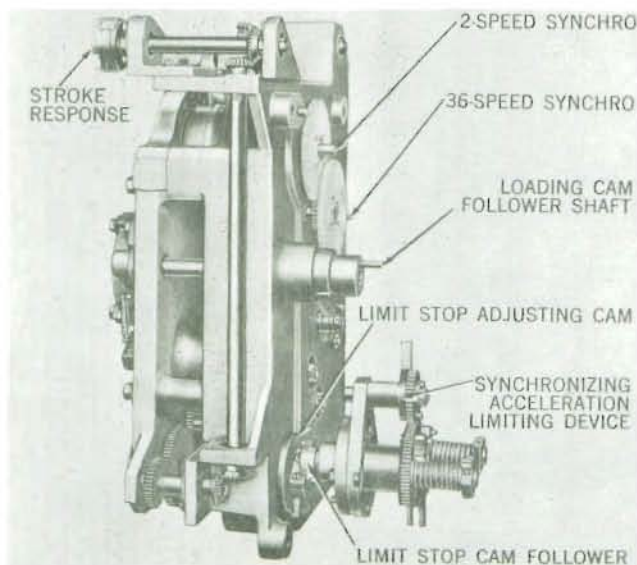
Elevation Receiver-Regulator Mk 10 Mod 0 Gear Train Assembly, Side View
